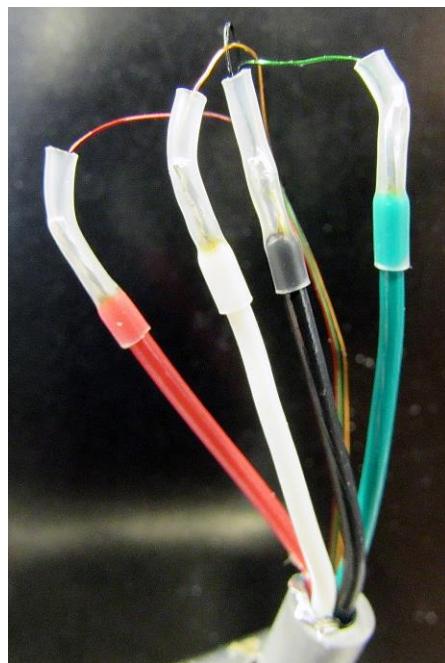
Heat Shrink Tubing on the Solder Joints
